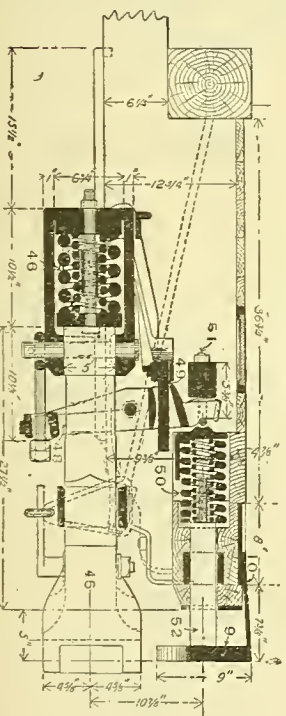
Sectioned Side Elevation of Jeanney-Buhoup Platform Attachment, as applied to Pullman Trestle.
